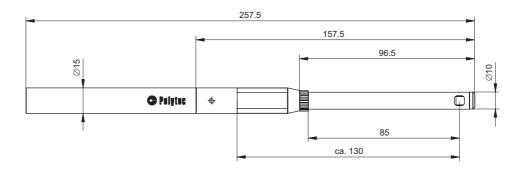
View of the side exit head OFV-C-110 (dimensions not specified are given in mm)
